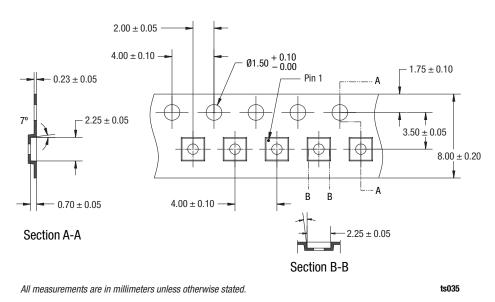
SE2568U 8-Pin QFN Carrier Tape Dimensions
